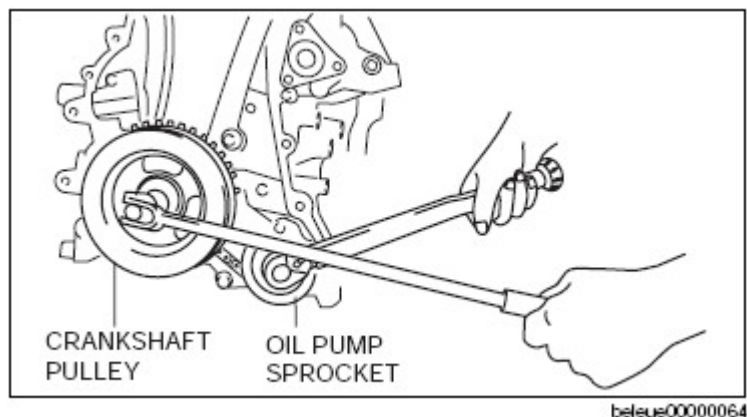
Tightening Crankshaft Pulley Lock Bolt
